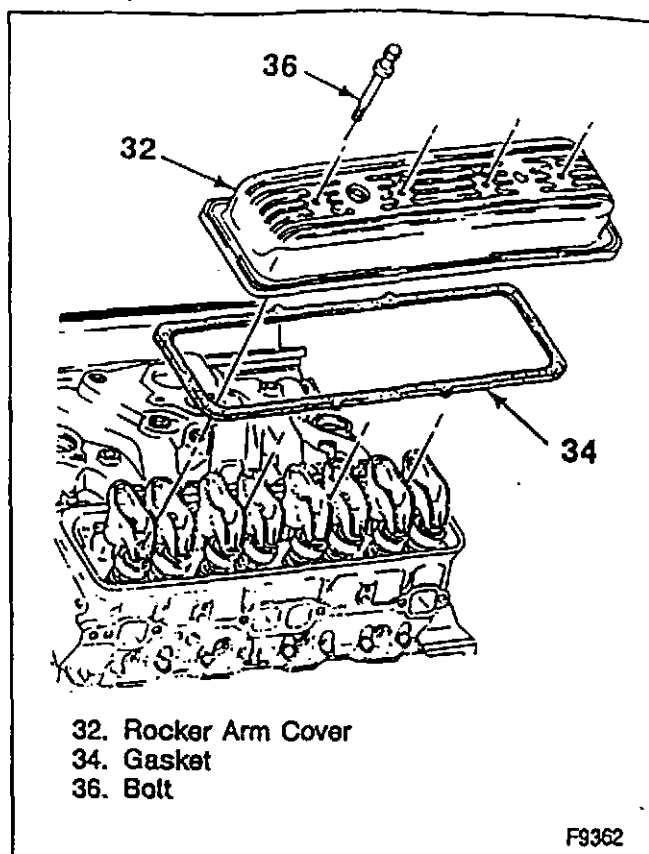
Rocker Arm Cover Installation (5.0L and 5.7L Engines)
